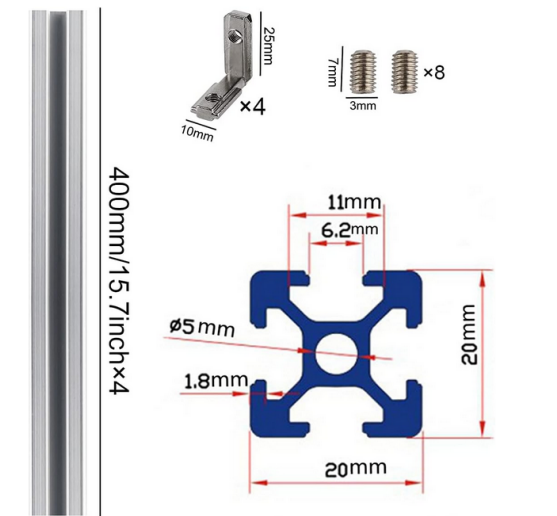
Extruded Aluminum Rods for Chassis [6]
